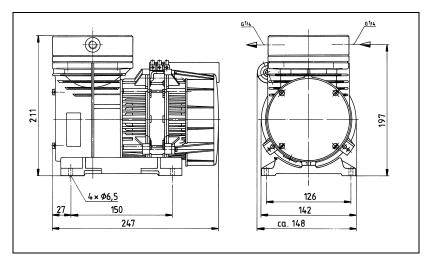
Mounting dimensions N 035 S\_E (IP20)
